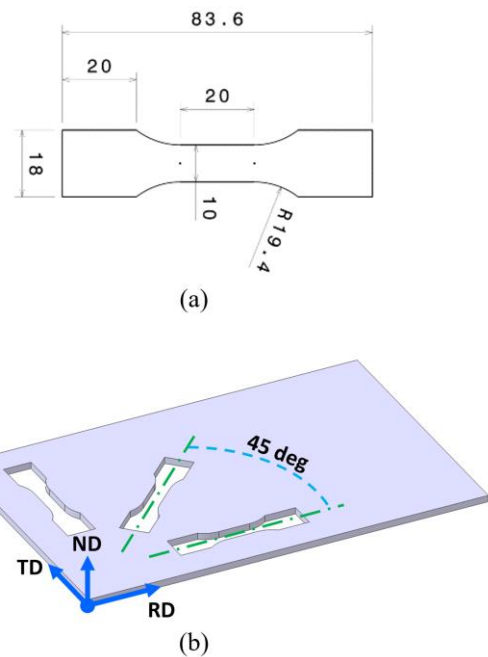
Tensile tests specimens: a) Dimensions, b) Cutting directions.
